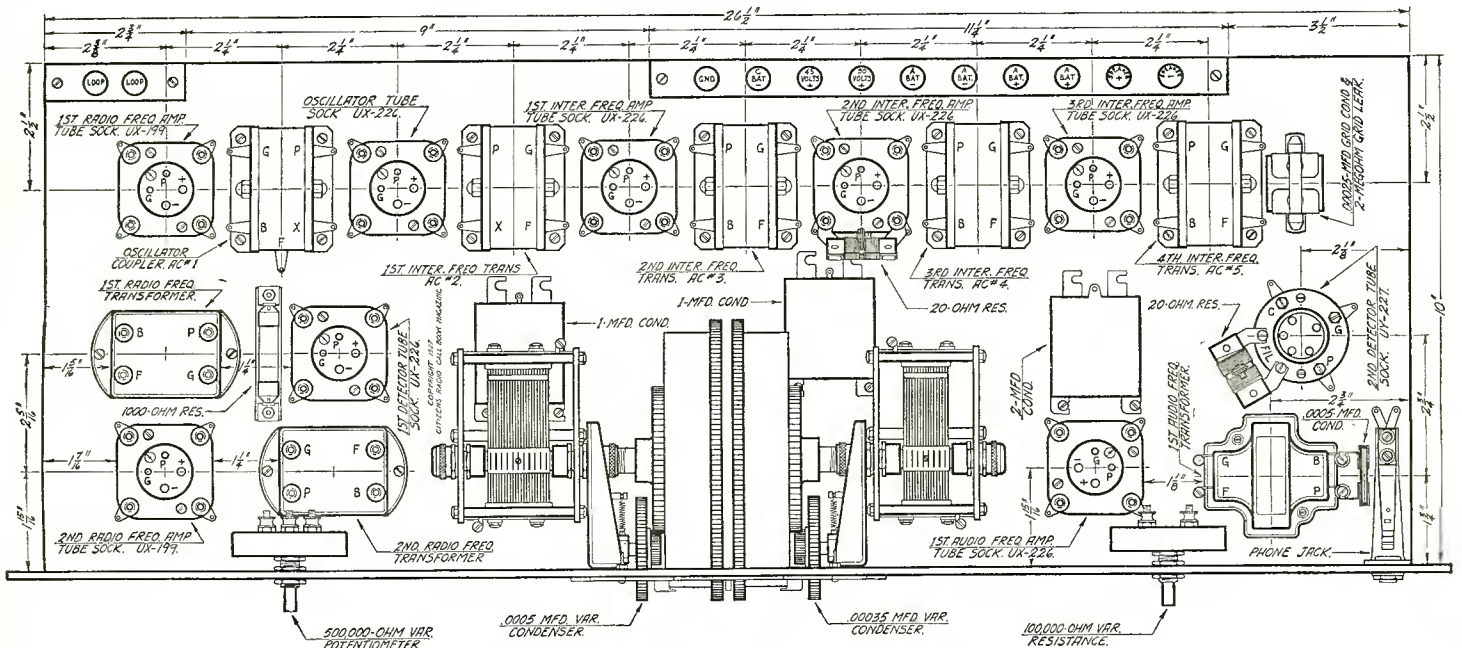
In construction of this receiver the builder would do well to lay out all parts in strict accordance with the baseboard layout shown in this illustration
